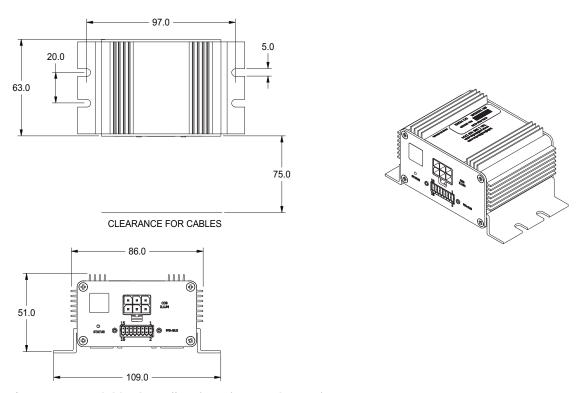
PFABUS COB Controller Dimensions – PBS Mounting
